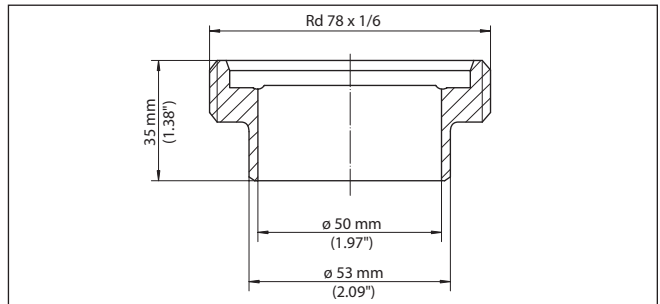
Dimensions of welded socket, slotted nut DN 50 (DIN 11864-1)
